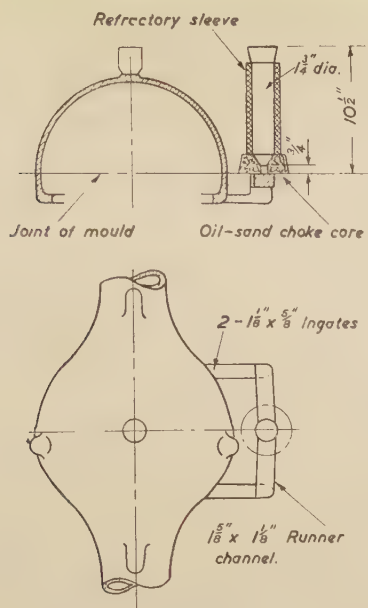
Details of the Down-Runner and Special Oil-Bonded Sand-Choke Core.
